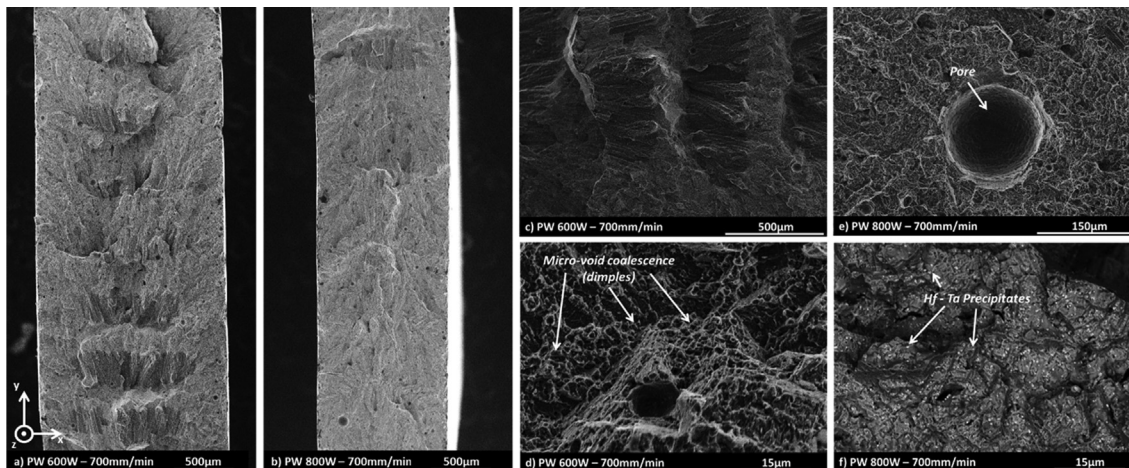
(a) and (b) cross section of the fracture surfaces; (c) and (d) fracture surface details of the sample produced with laser power of 600 W; (e) and (f) fracture surface details of the sample produced with laser power of 800 W.
